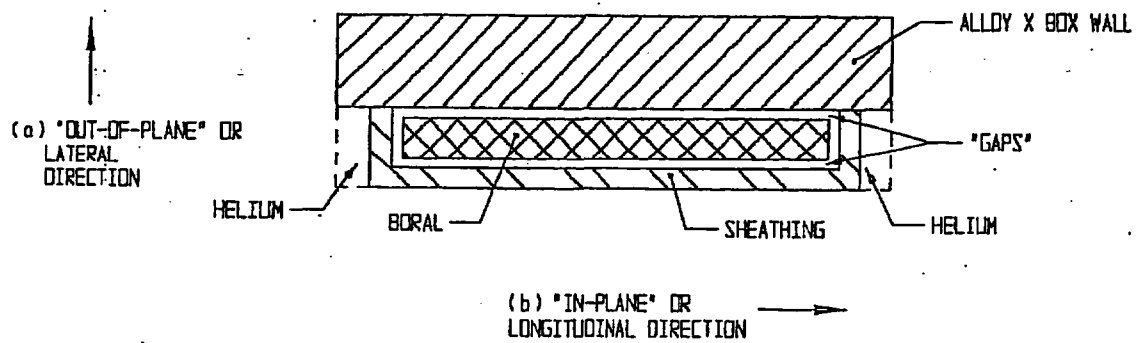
"BOX WALL-BORAL-SHEATHING" SANDWICH
